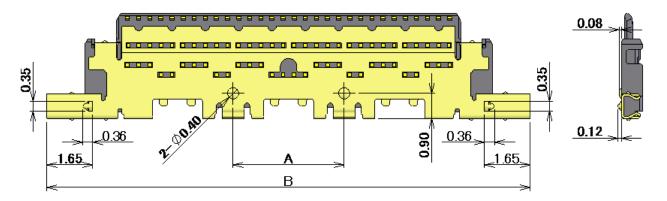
The Shell Bottom Side of Plug Housing Assembly
